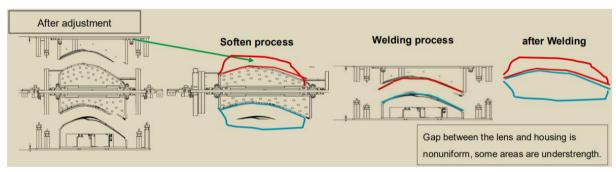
The bad situation of soften process, welding process and after welding, the green and blue lines are connected badly with a gap between them
